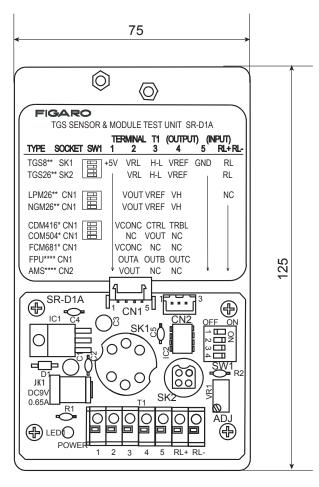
Dimensions of SR-D1A (u/m = mm)
